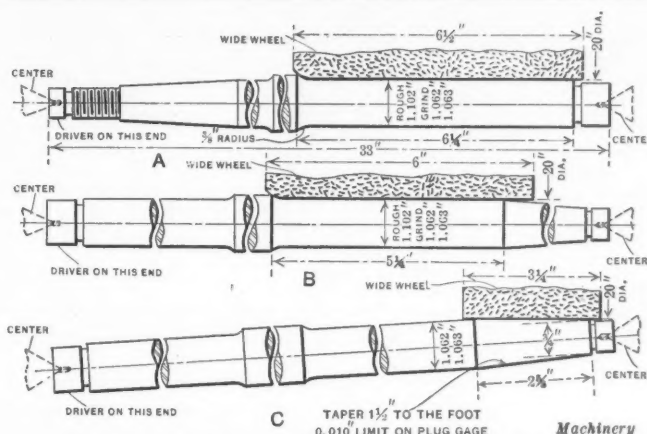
Finishing a Ford Rear Axle Shaft Complete by Form Wheel Method
